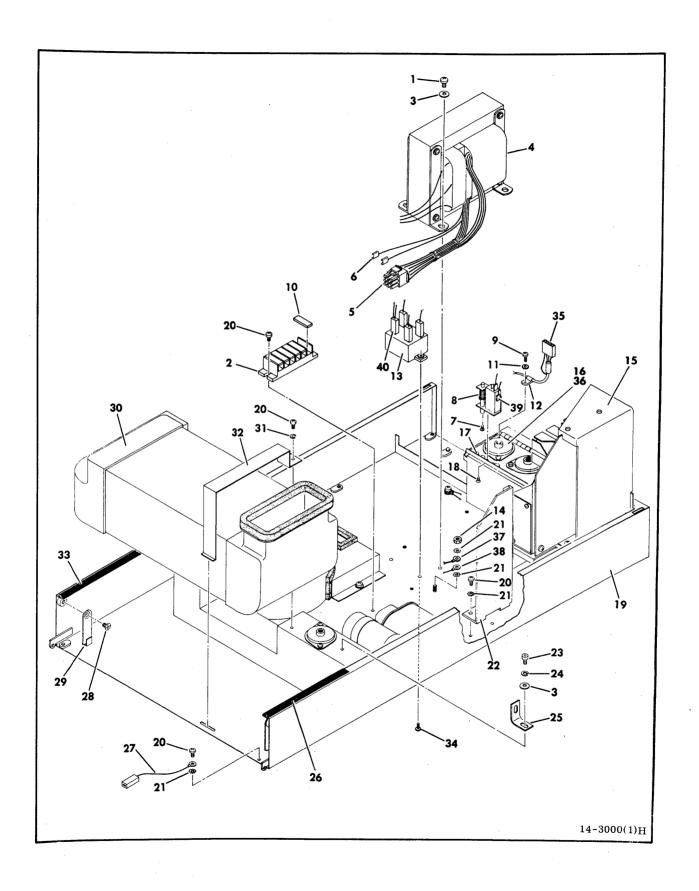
Base Assembly 471718XX (Sheet 1 of 4) 83322150 W
